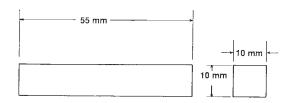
Standard Vee Notch Charpy Bar Impact Test Specimen
